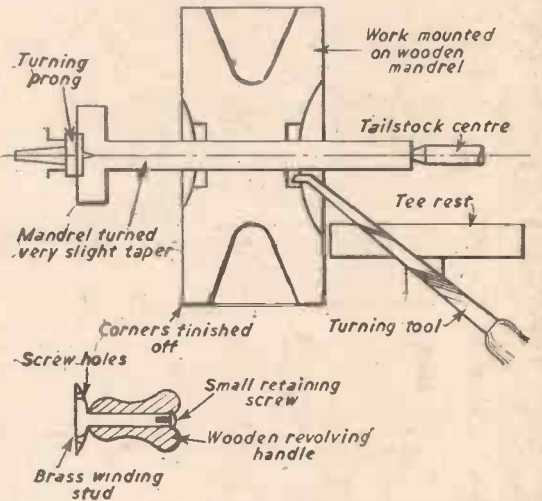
shows the small winding handle (two required for balance) and the drawing is self explanatory.
